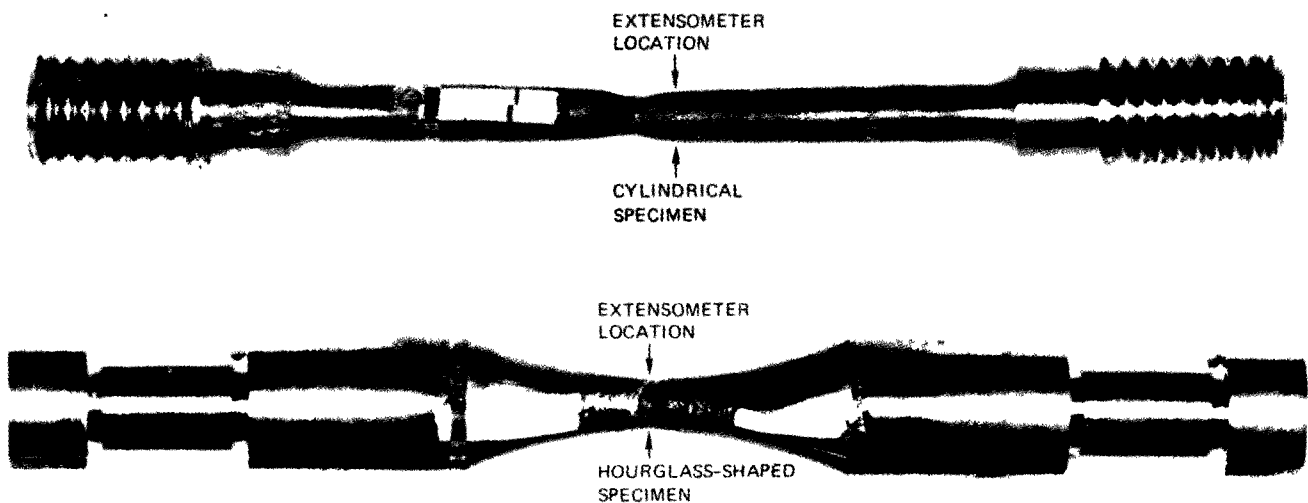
Cylindrical and hourglass-shaped AISI 304 stainless-steel tensile specimens after testing at 650°C in air.
